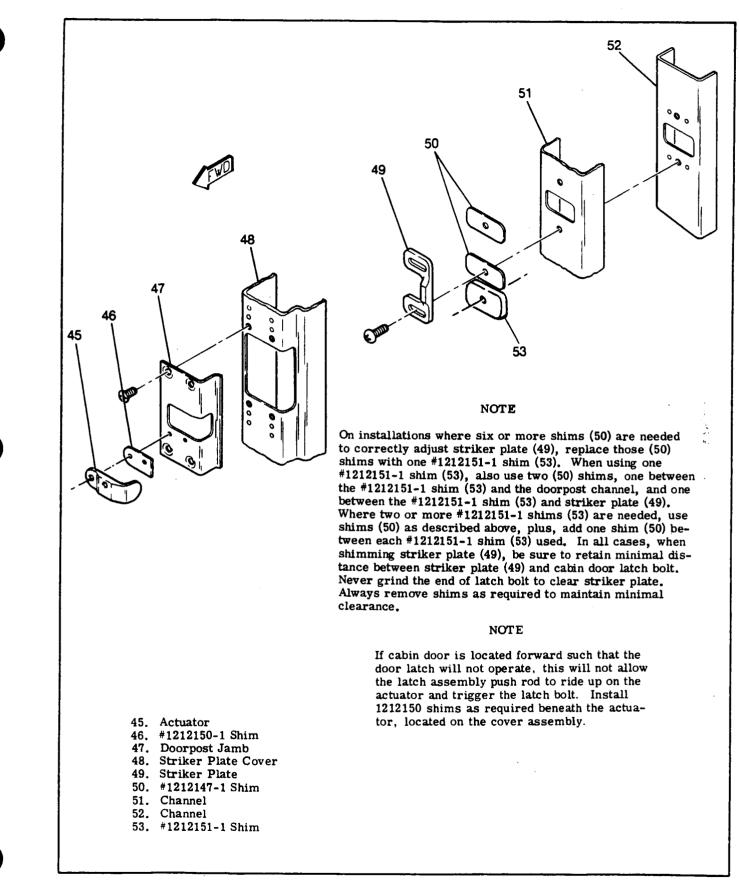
Cabin Door and Latch Assembly (Sheet 3 of 3)
